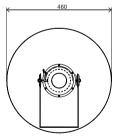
Assembly of the LHW-UMS-IN horn with the LHD-UM60-IN driver
